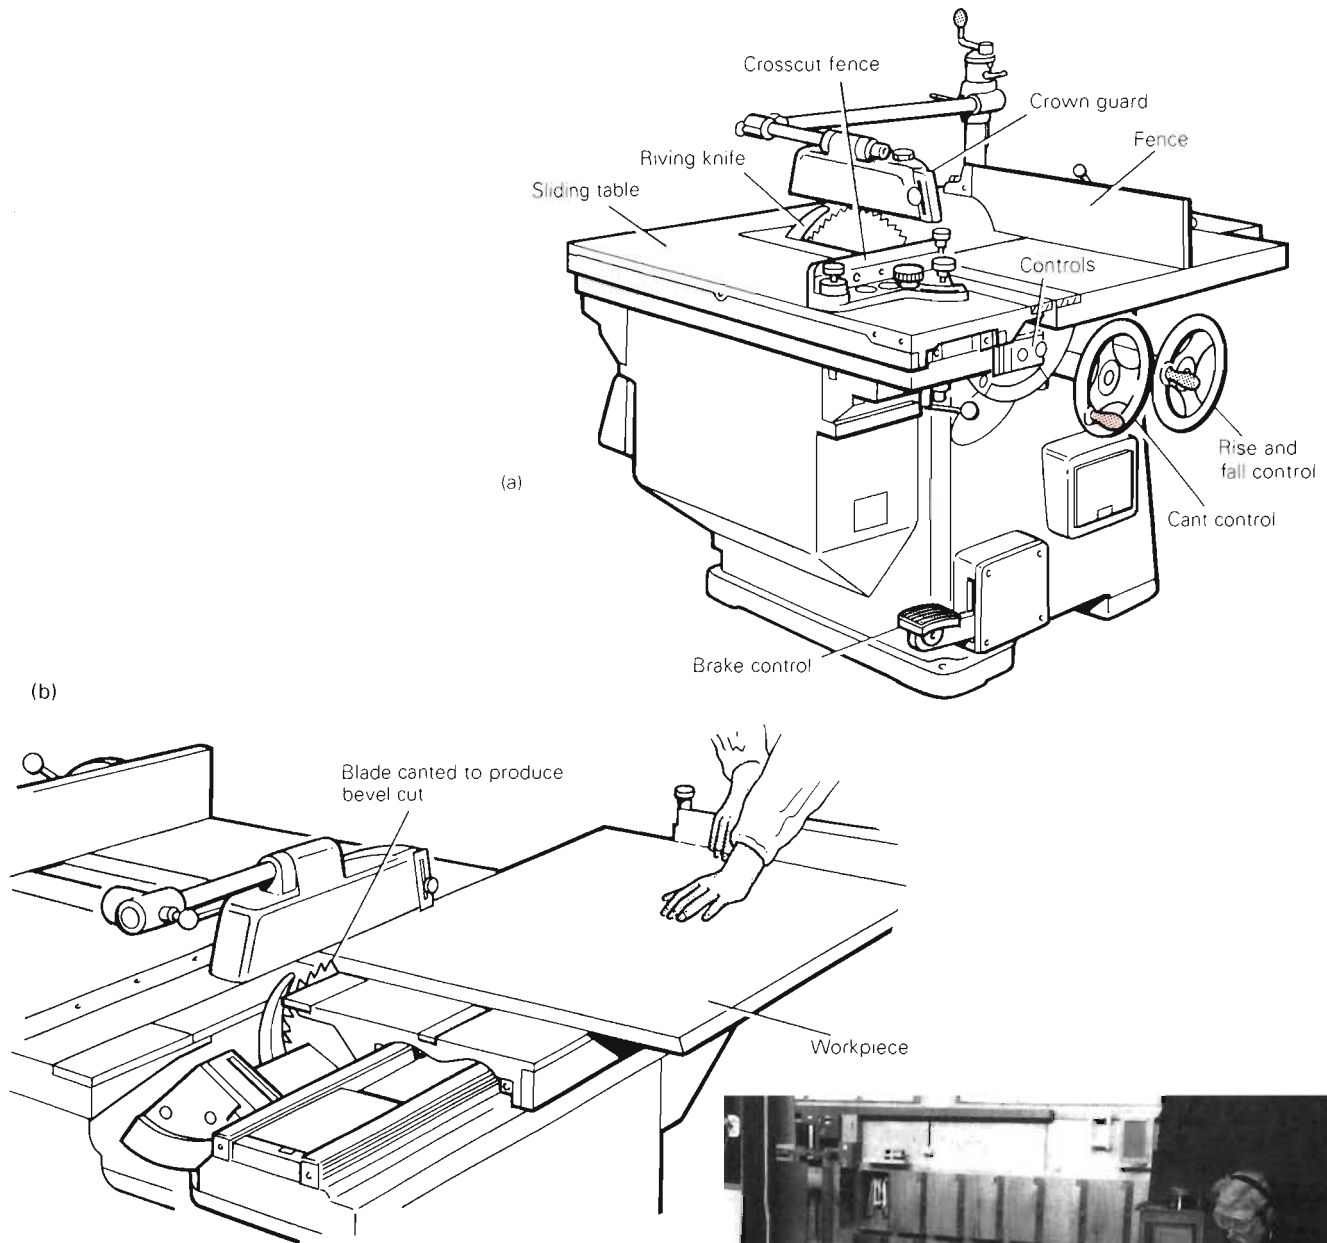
The dimension saw: (a) the saw, (b) detail of the sliding table.
